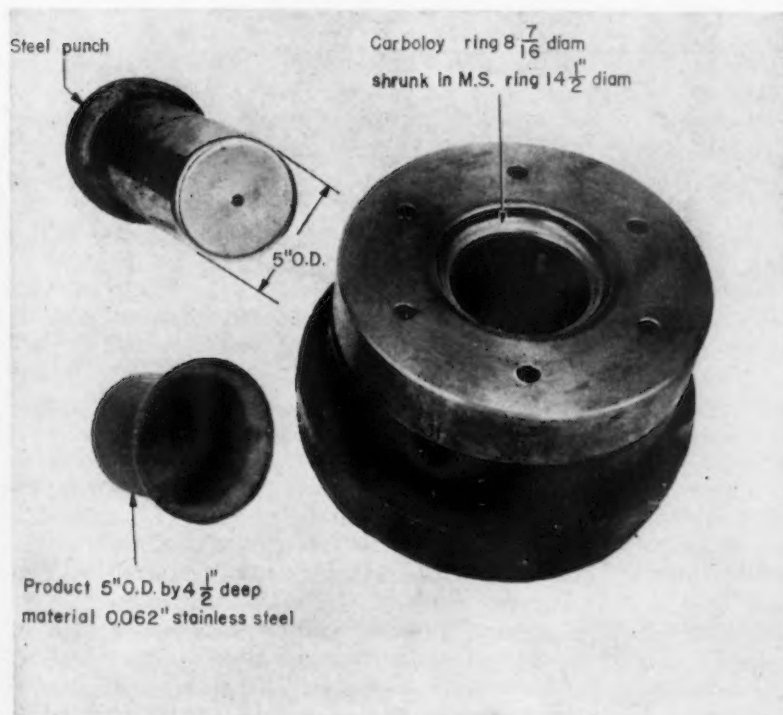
This Carboloy draw die and steel punch was purchased more than 4 years ago and has since produced more than 20,000 parts with no indication of wear.
